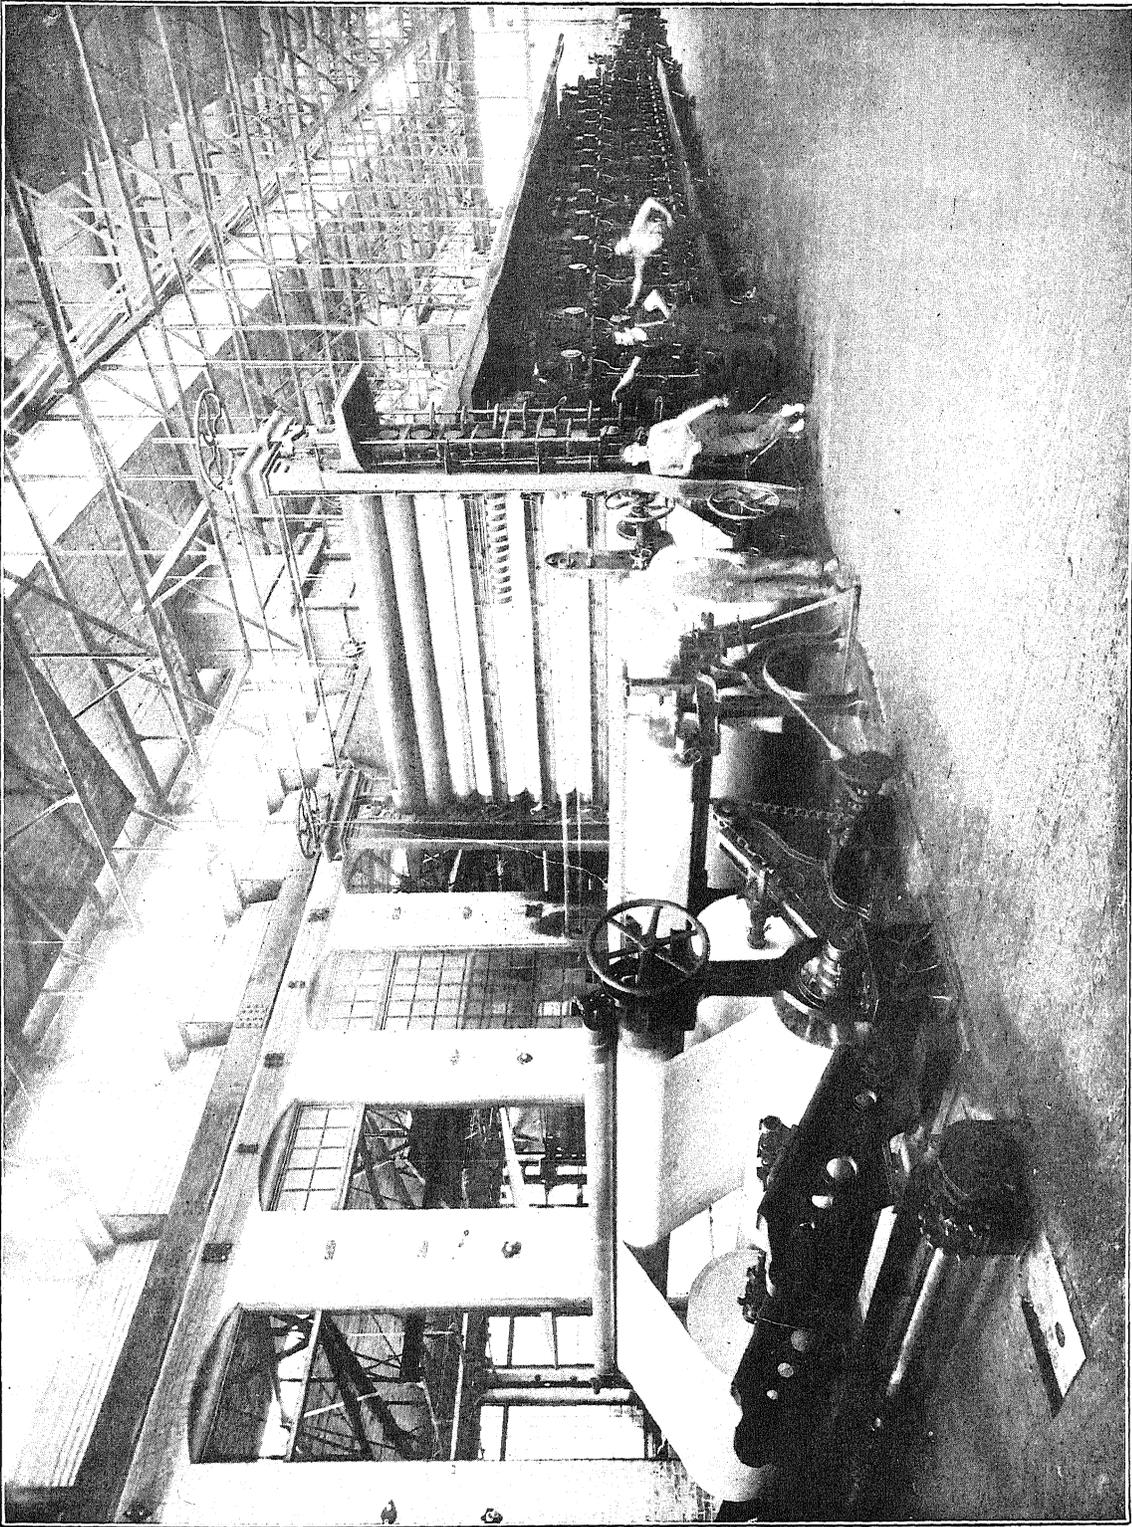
WIDEST PAPER MACHINE IN THE WORLD.
